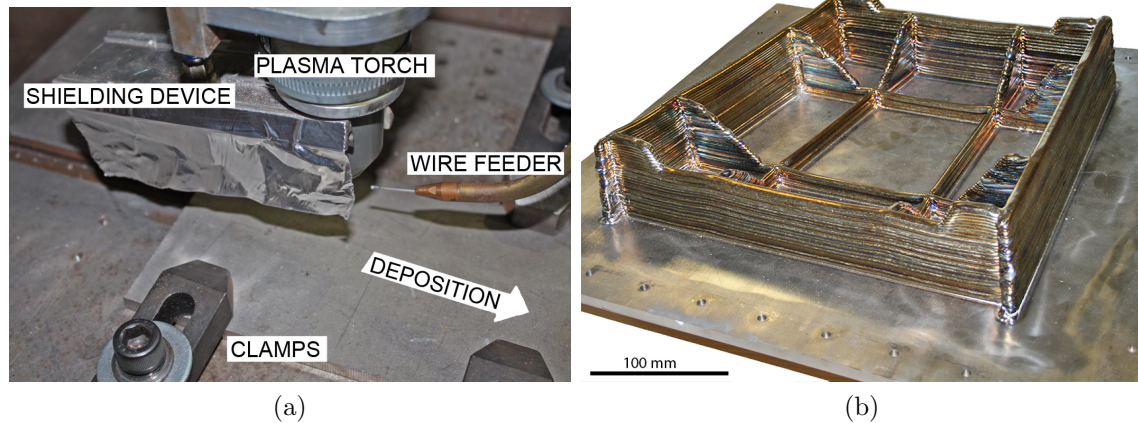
PWD (a) setup (Martina, 2010) and (b) manufactured parts (courtesy Cranfield University).
